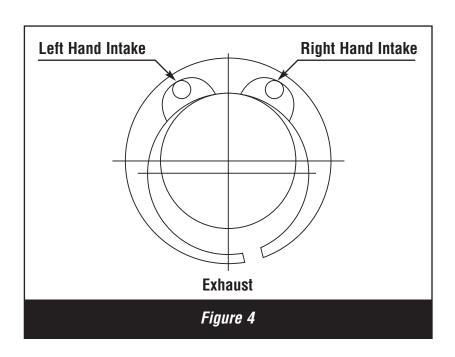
shows a typical Reverse biased motor configuration used by Sioux Tools and many other pneumatic tool manufacturers.
